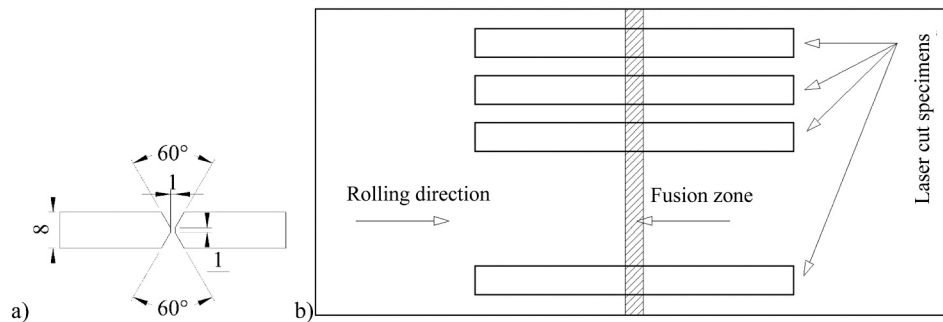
Specimen preparation, (a) the butt-weld configuration (b) schematic of the butt-welded workpiece and the laser-cut sections. (Dimensions are in mm, not to scale).
